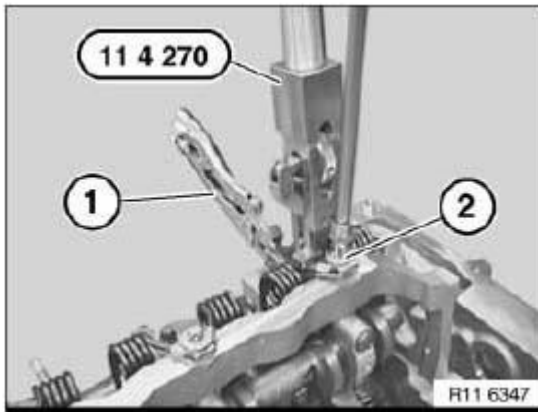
Identifying Special Tool (11 4 270) And Steel Screw
